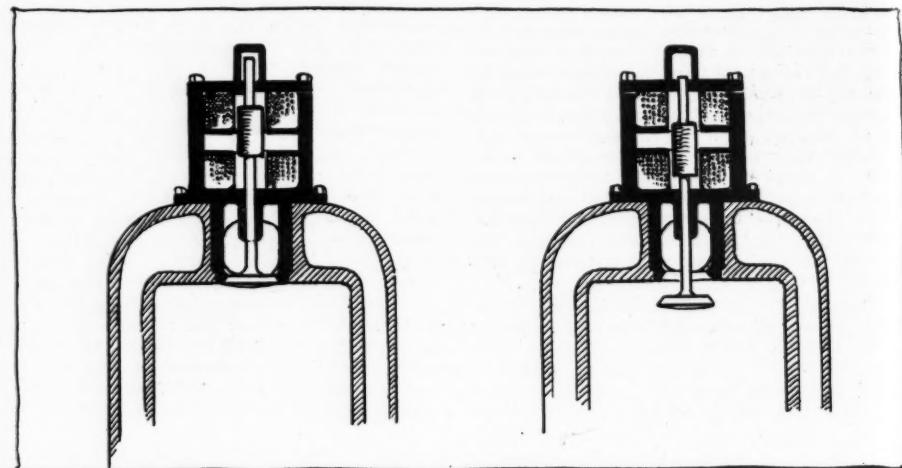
METHOD SUGGESTED FOR OPERATING VALVES MAGNETICALLY
